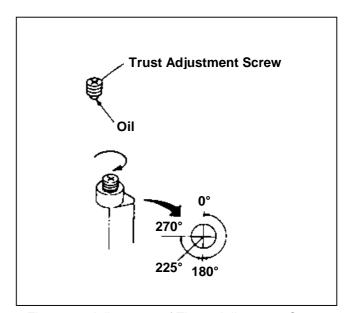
Adjustment of Thrust Adjustment Screw
